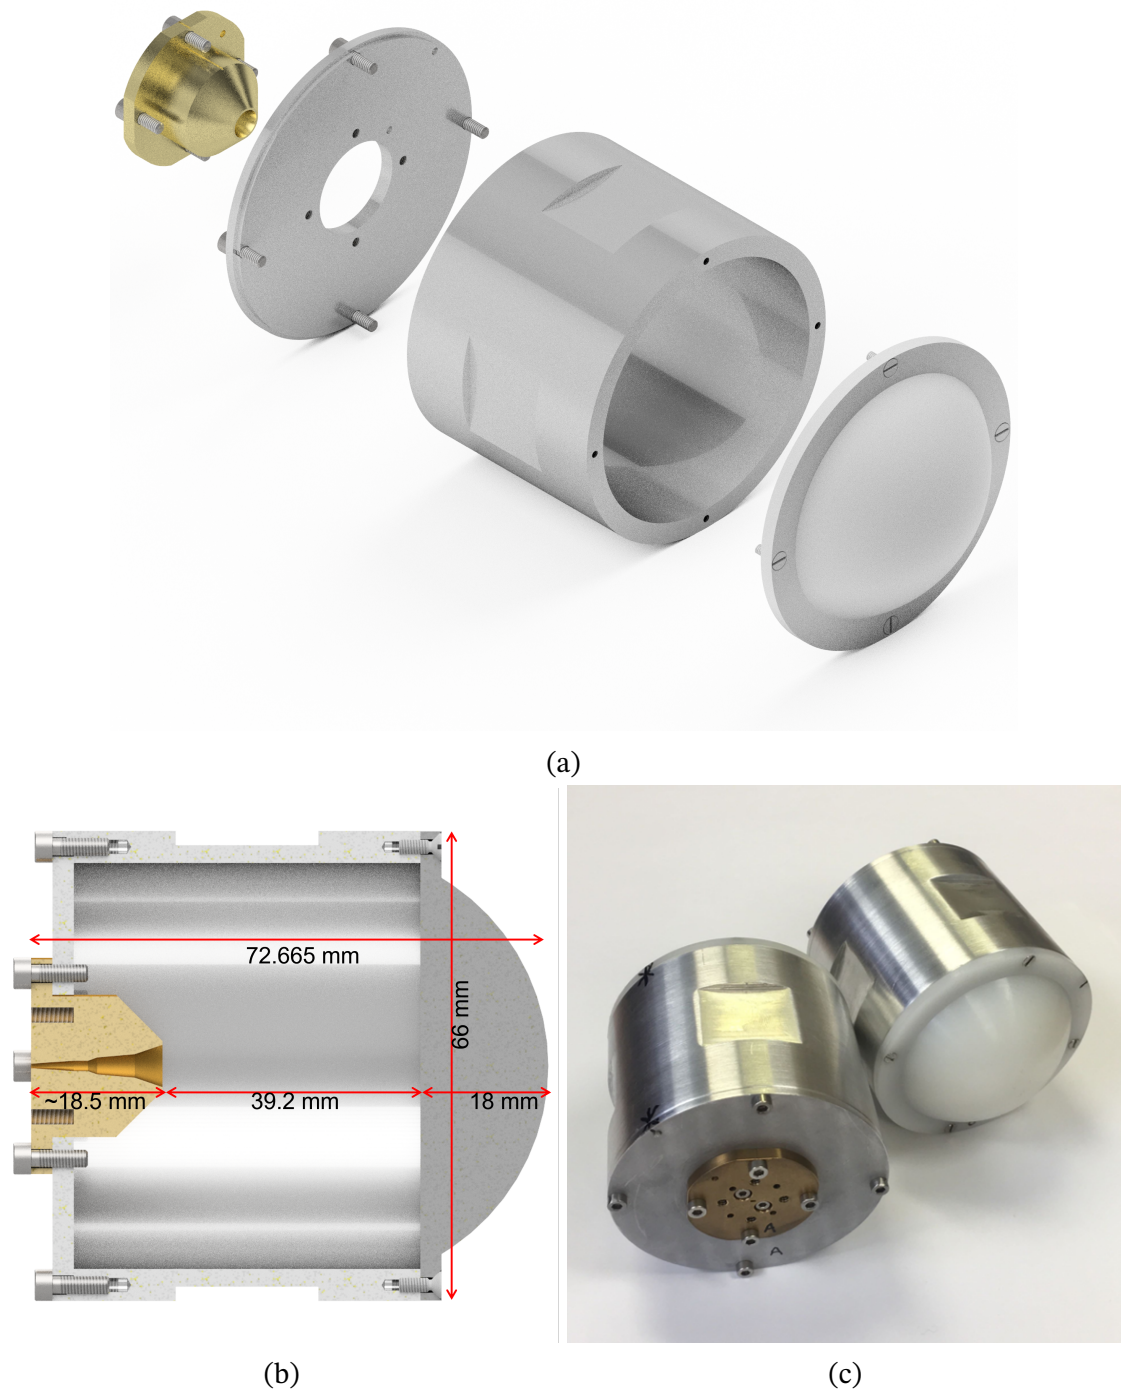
(a) An exploded view CAD rendering of the full GOLA mechanical design, showing (left to right) the horn, end cap, tube, and lens, (b) a CAD rendering of a GOLA with annotation indicating critical dimensions, and (c) both manufactured units. The absorber lining is omitted from the CAD models. Figures (b) and (c) were first published in Vattulainen et al. [23].
